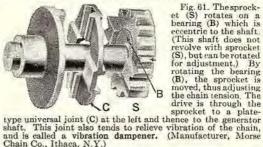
The sprock-et (S) rotates on a bearing (B) which is eccentric to the shaft. (This shaft does not revolve with sprocket (S), but can be rotated
